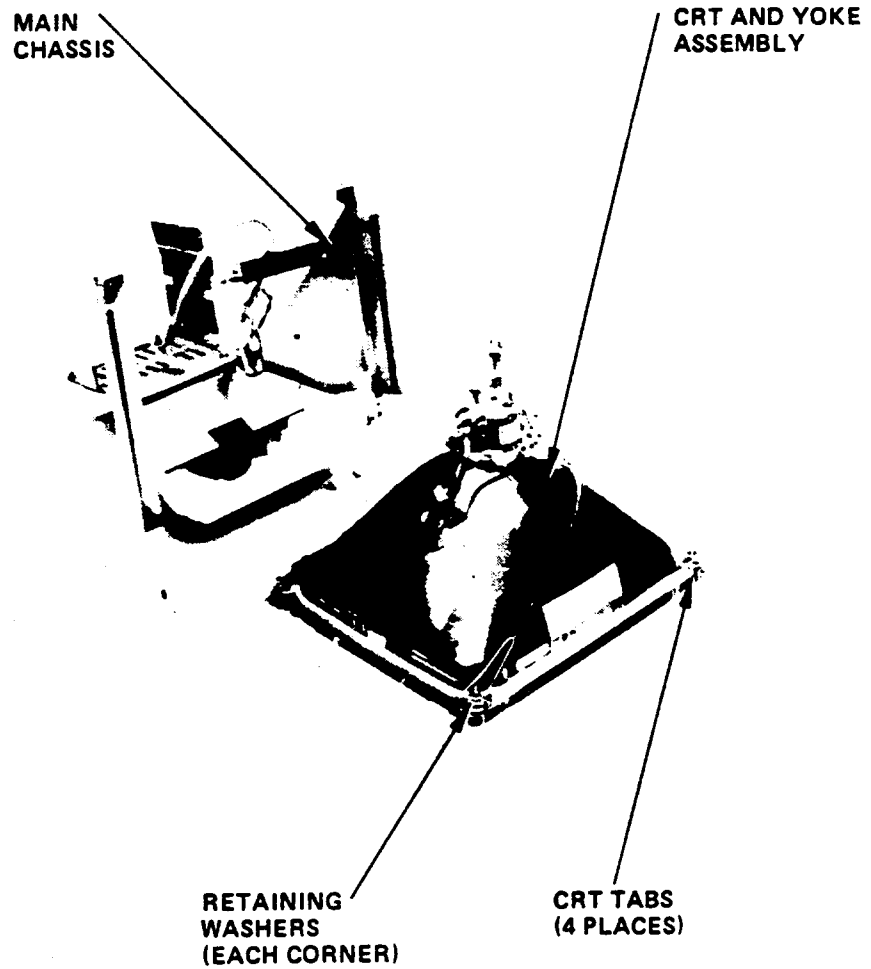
Removing the CRT and Yoke Assembly from the Main Chassis
